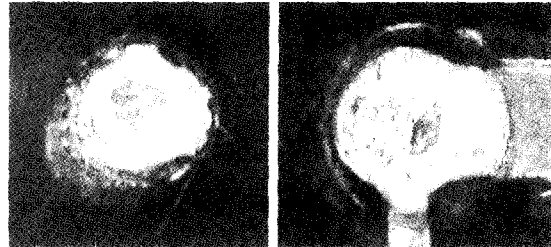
An Interfacial Fracture on the Solder and PCB interface for a Sn-3.5Ag Solder Joint: Solder interface on the BGA (left) and Solder interface on the PCB (right).
